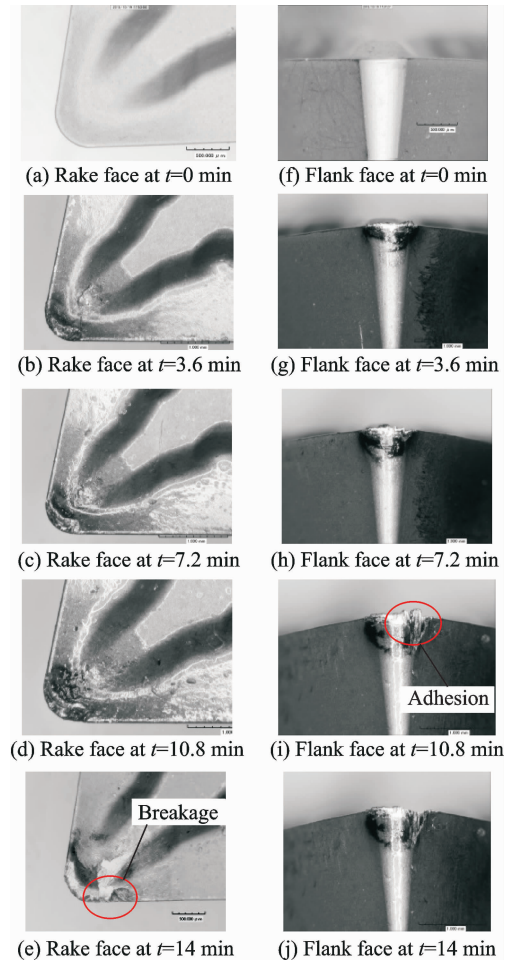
Typical tool wear process($v=50$ m/min, $f=0.1$ mm/rev)
